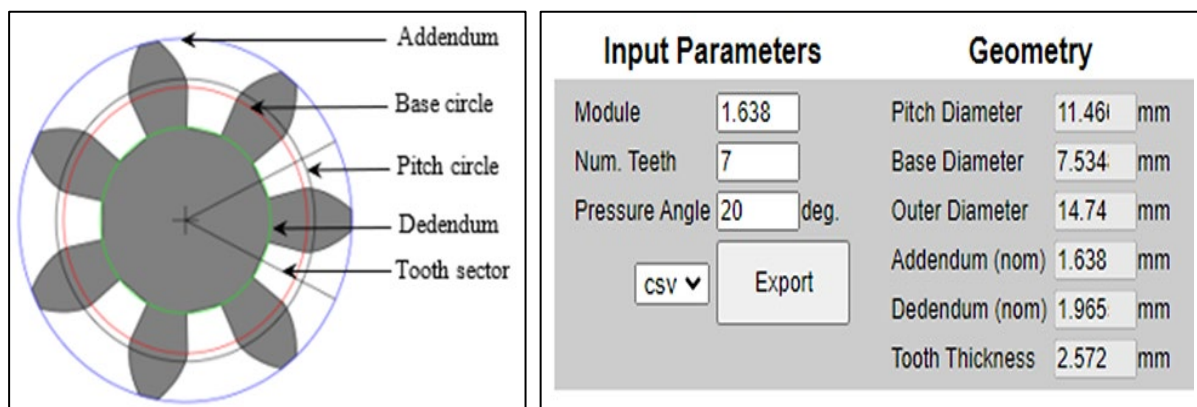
(a) 7 teeth gear design, (b) Design parameters
